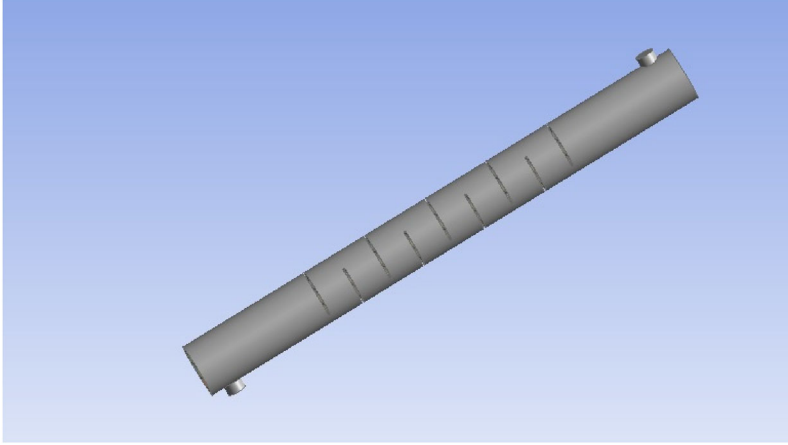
Conventional one-piece baffle plate shell and tube heat exchanger.
